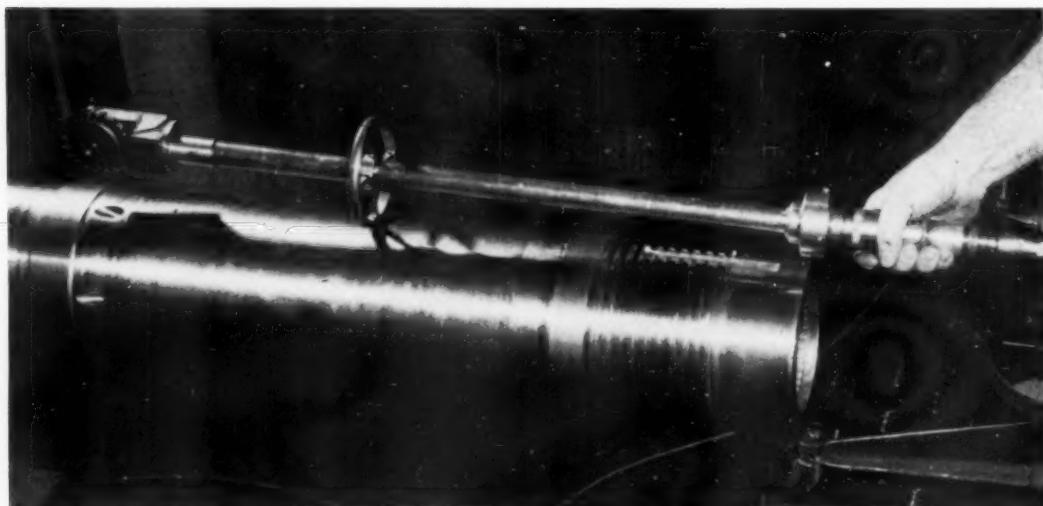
Wire brush for deburring holes inside rifled gun bore reduced operation time from 18 to three minutes.
